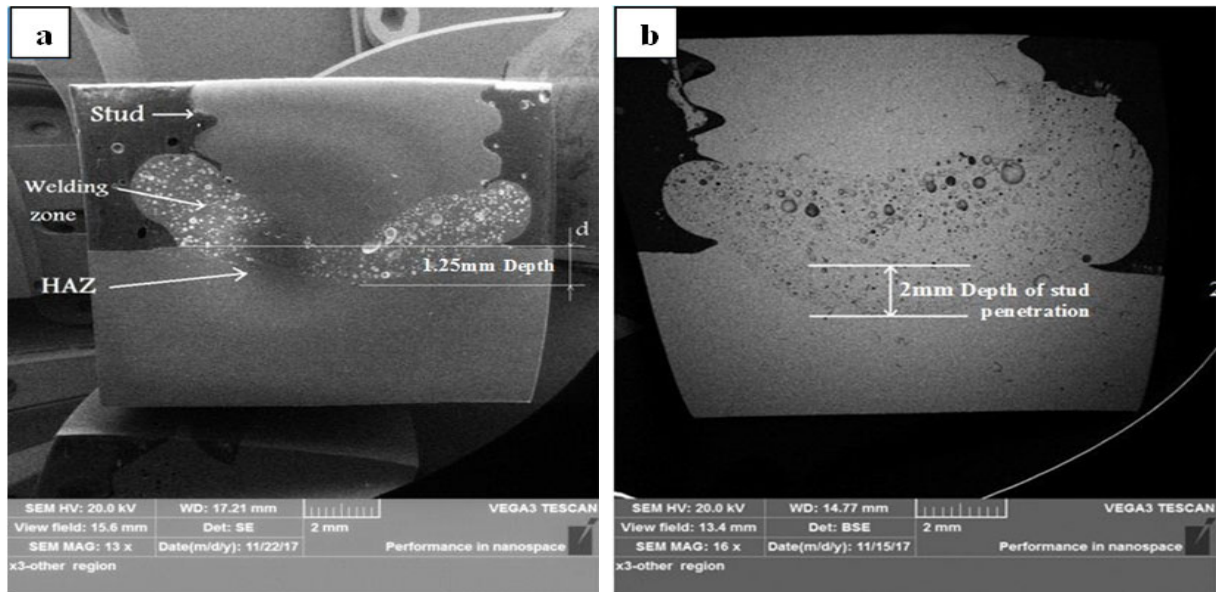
SEM images of welded joints (a) penetration of similar weldment (b) penetration of dissimilar weldment
